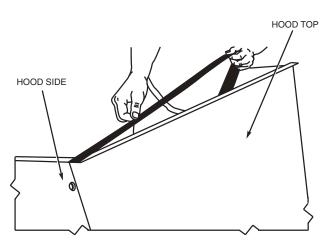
Adding Seal Strip to Back of Hood Top Mounting Flange
